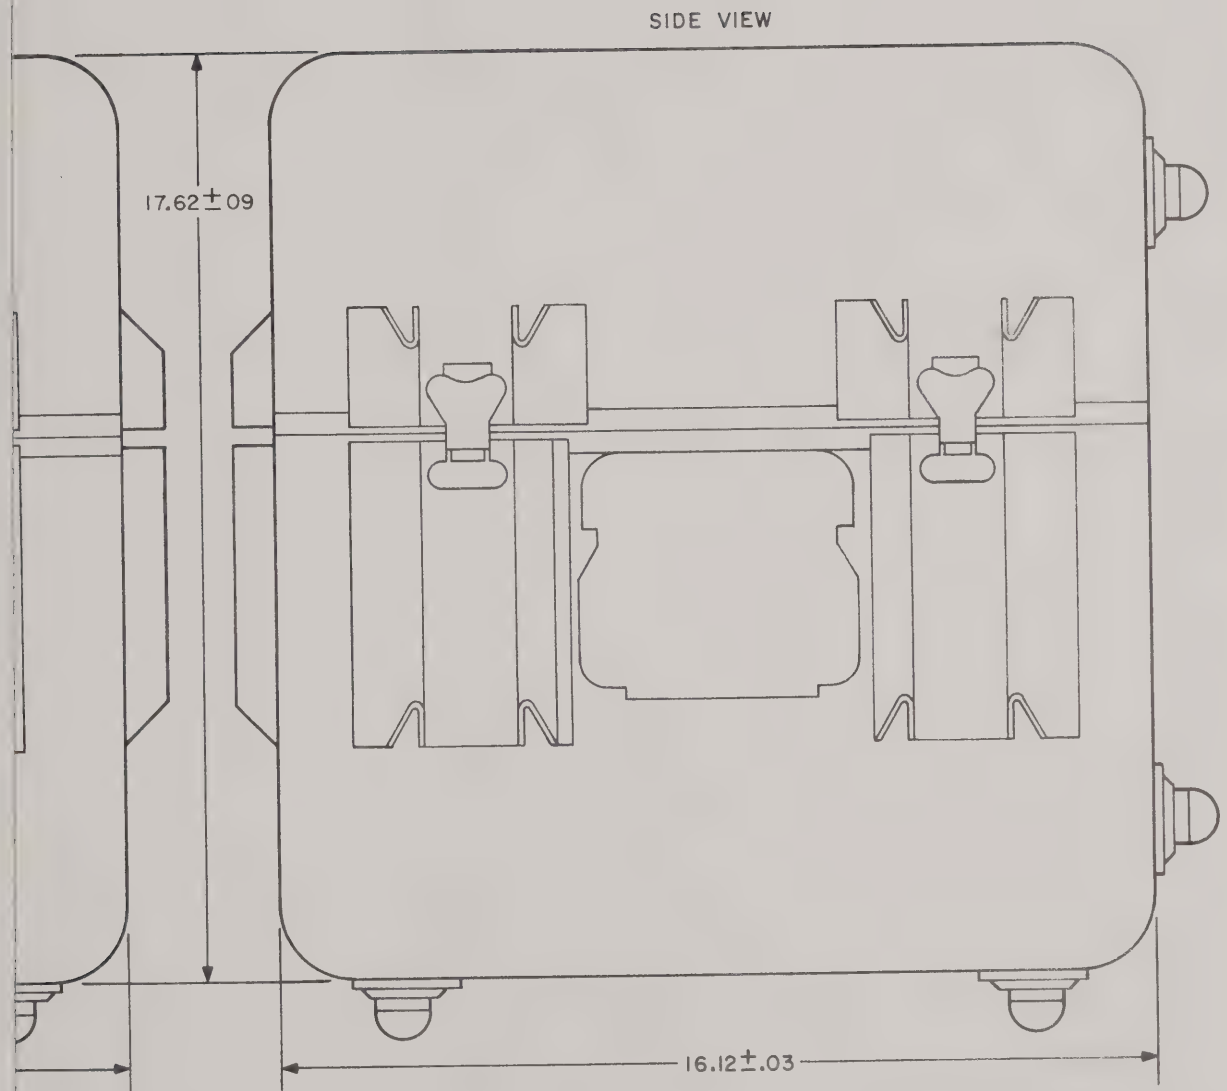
Test Set Coupler, MX-8154/TYA-11, Installation Drawing
